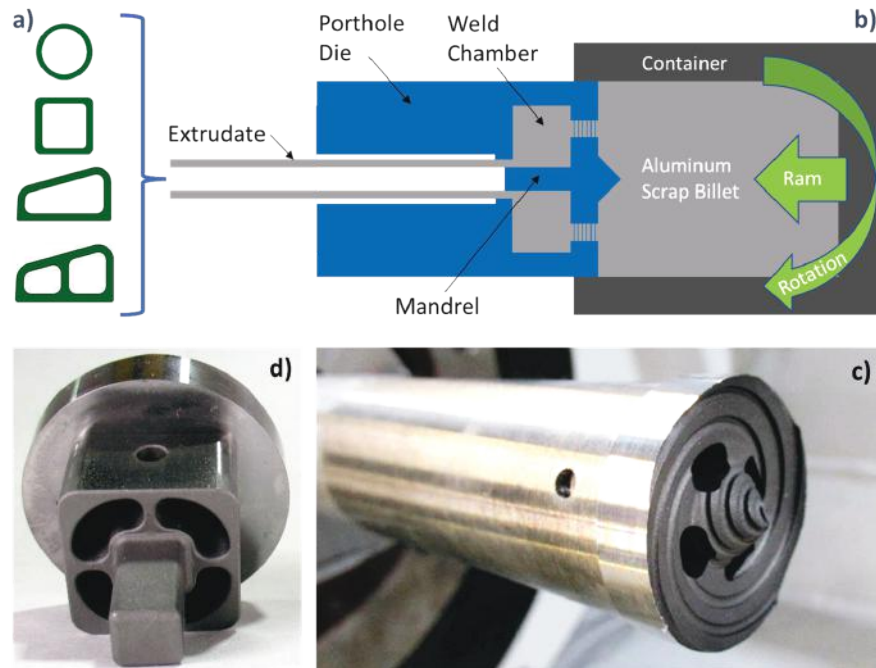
(a) Extruded profiles manufactured using a porthole die integrated with the ShAPE process. (b) Schematic of porthole die integrated with a rotating billet. (c) Porthole die assembly with surface features to assist material flow. (d) Back side of porthole die head showing port exits and square mandrel
